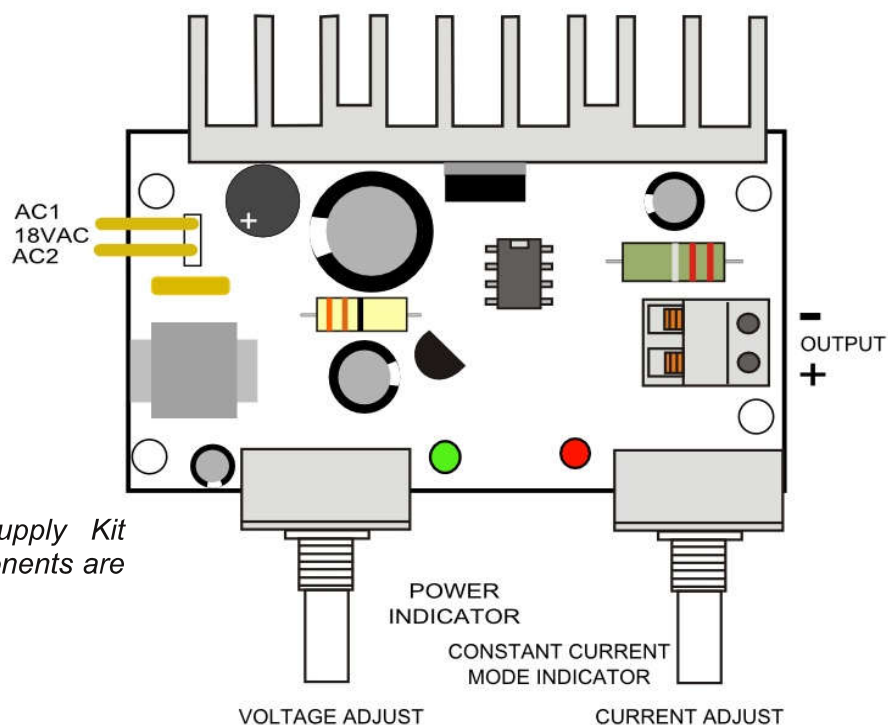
e-Gizmo DC Power Supply Kit component layout. Only major components are shown in the layout for clarity.
